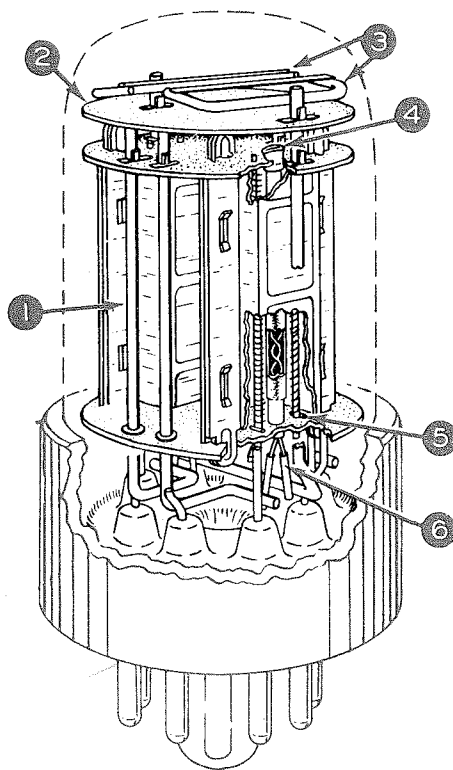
Cutaway drawing showing design features of RCA "Special Red" tube types.
